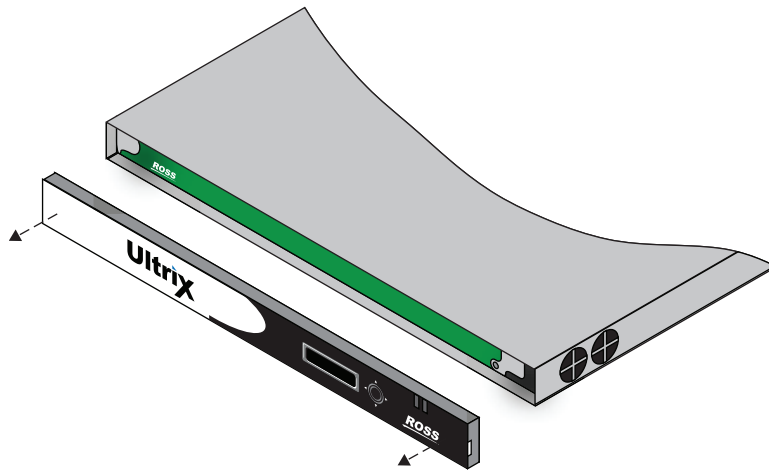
ULTRIX-FR1-NS Front Panel — Removing the Door
